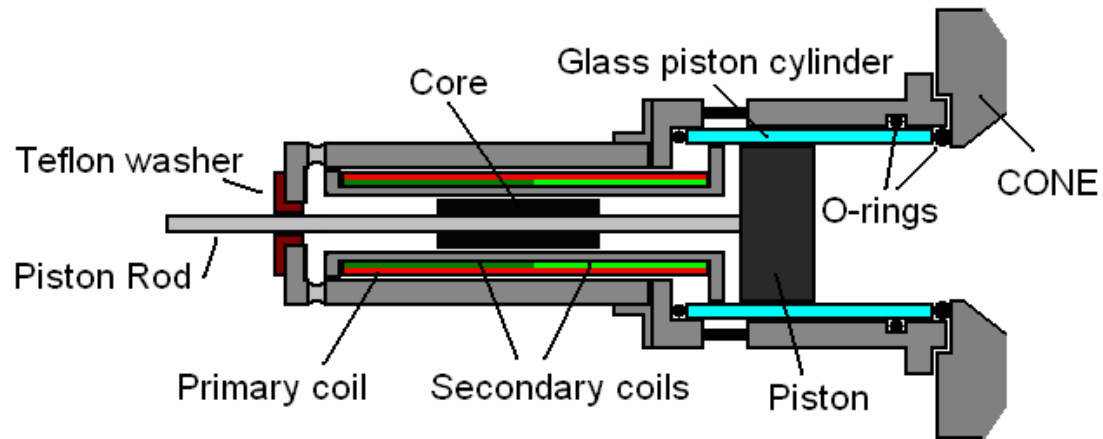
Piston, PVC fixture and LVDT. Mounting screws and other small mechanical components have been omitted to retain figure clarity.
